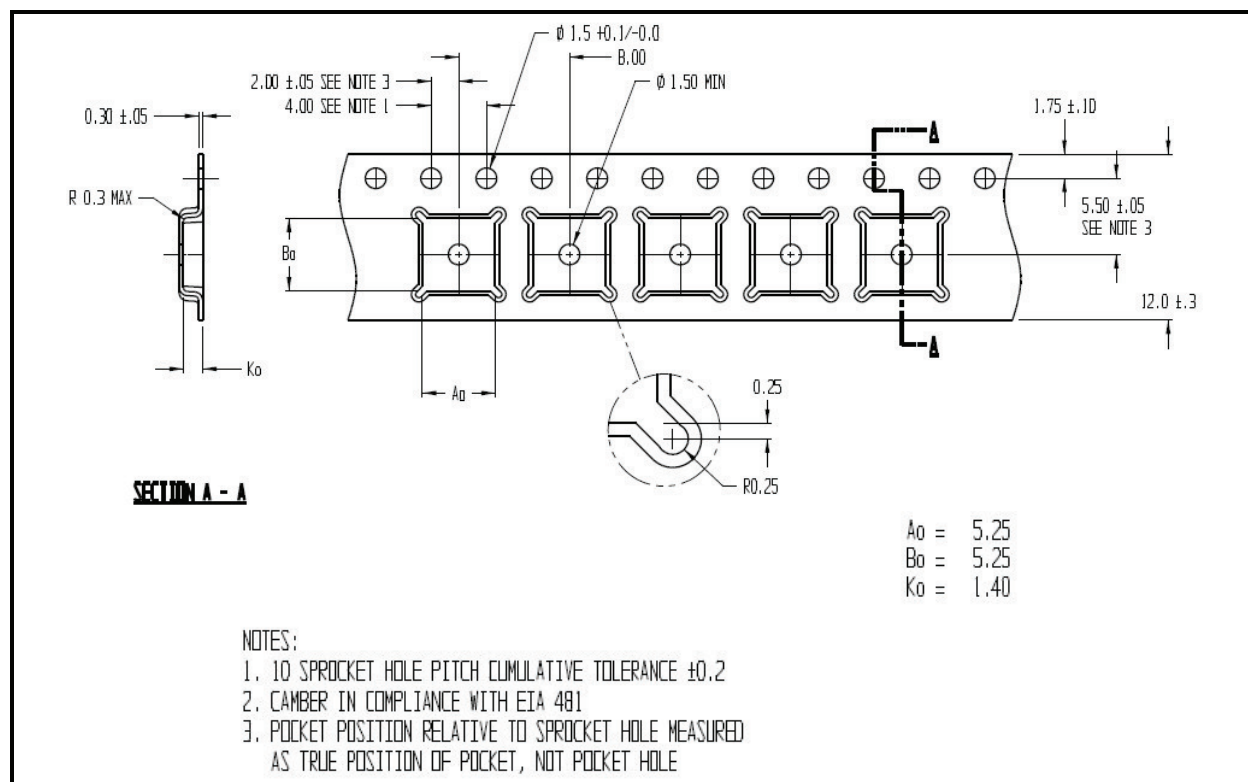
Detailed Tape and Reel Information (All diminensions in Millimeters)
